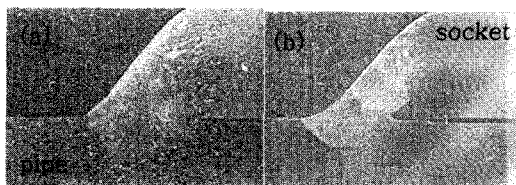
Optical micrographs showing the cross section of socket welded pipe joint at each weldment; (a) without defect and (b) with defect
